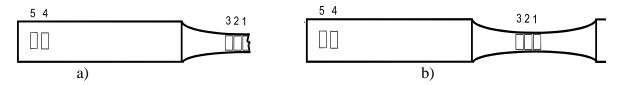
Scheme of cutting: a) of the broken specimens, b) for the non-broken specimens
